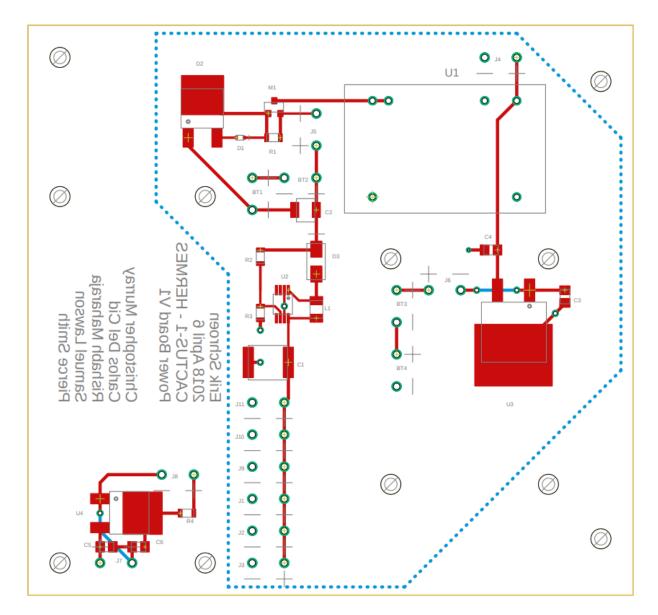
CACTUS – Hermes 3.0 power board PCB design, the blue dotted line is the ground plane. This design used PC 104 standard.
